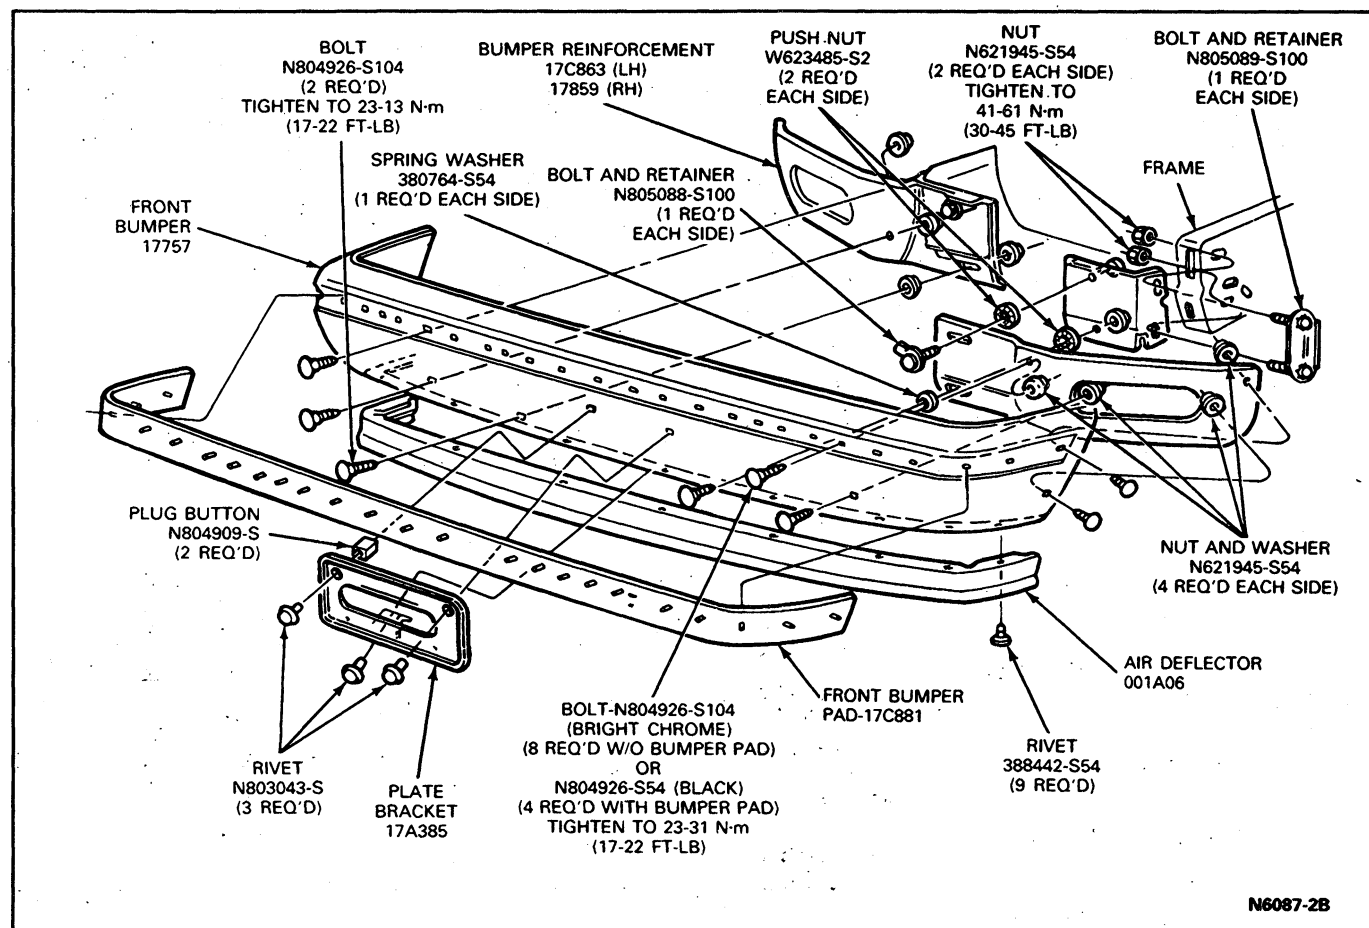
Bumper Installation—F-150—F-350—F-Super Duty Chassis Cab and Bronco
